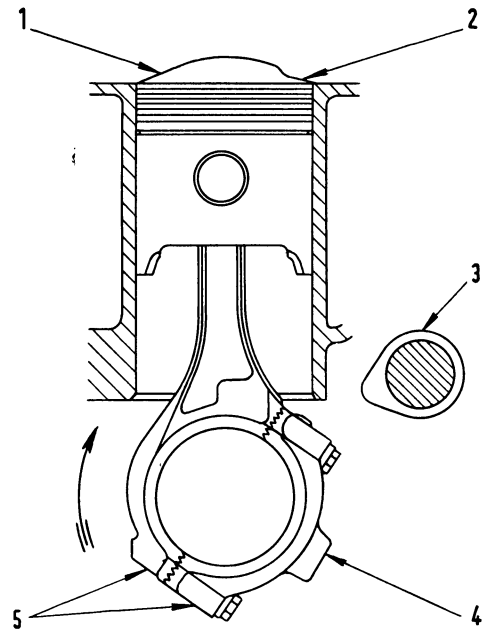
Connecting rod-piston assembly installation diagram. Engine 115 C.005.
